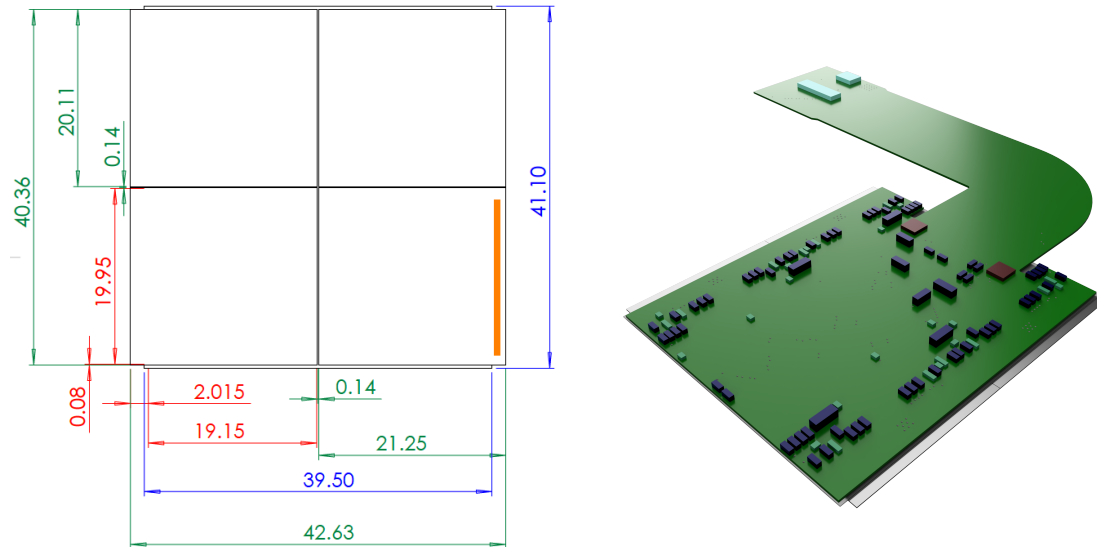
Left: Drawing of a quad module with four pixel front-end chips viewed from the front-end chip side, all dimension in mm. Front-end chip dimension are green with the wire-bond pad area indicated in gold on the lower right chip. Sensor dimension are in blue and in red the distances from and to the outermost bump-bond pads of the lower left chip are given. Right: 3D view of a quad module for the outer barrel flat section viewed from the module flex side.
